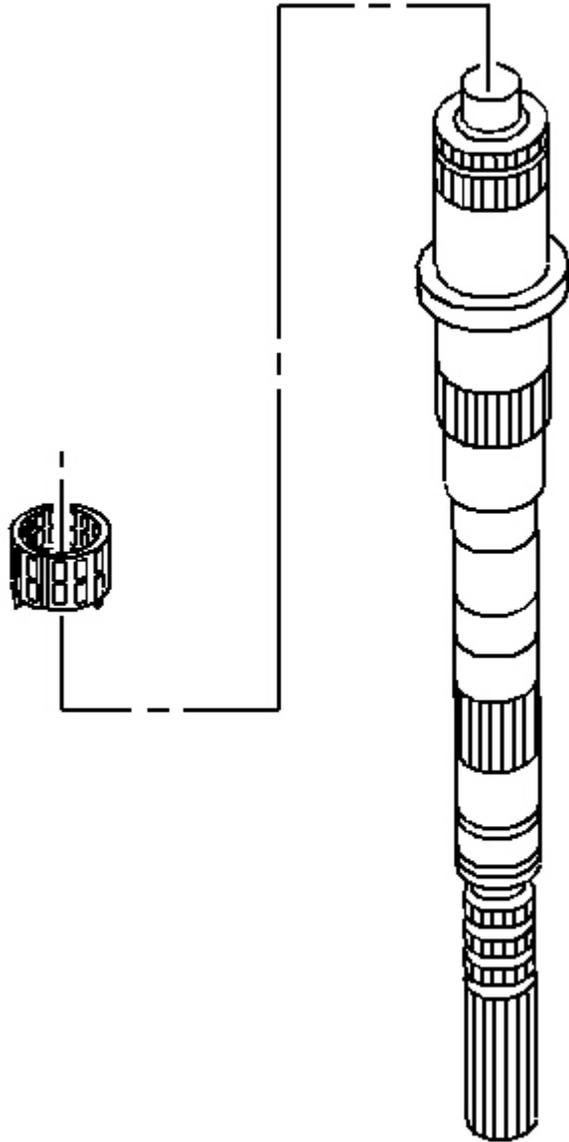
View Of 3rd Speed Gear Caged Needle Bearing & Spacer
